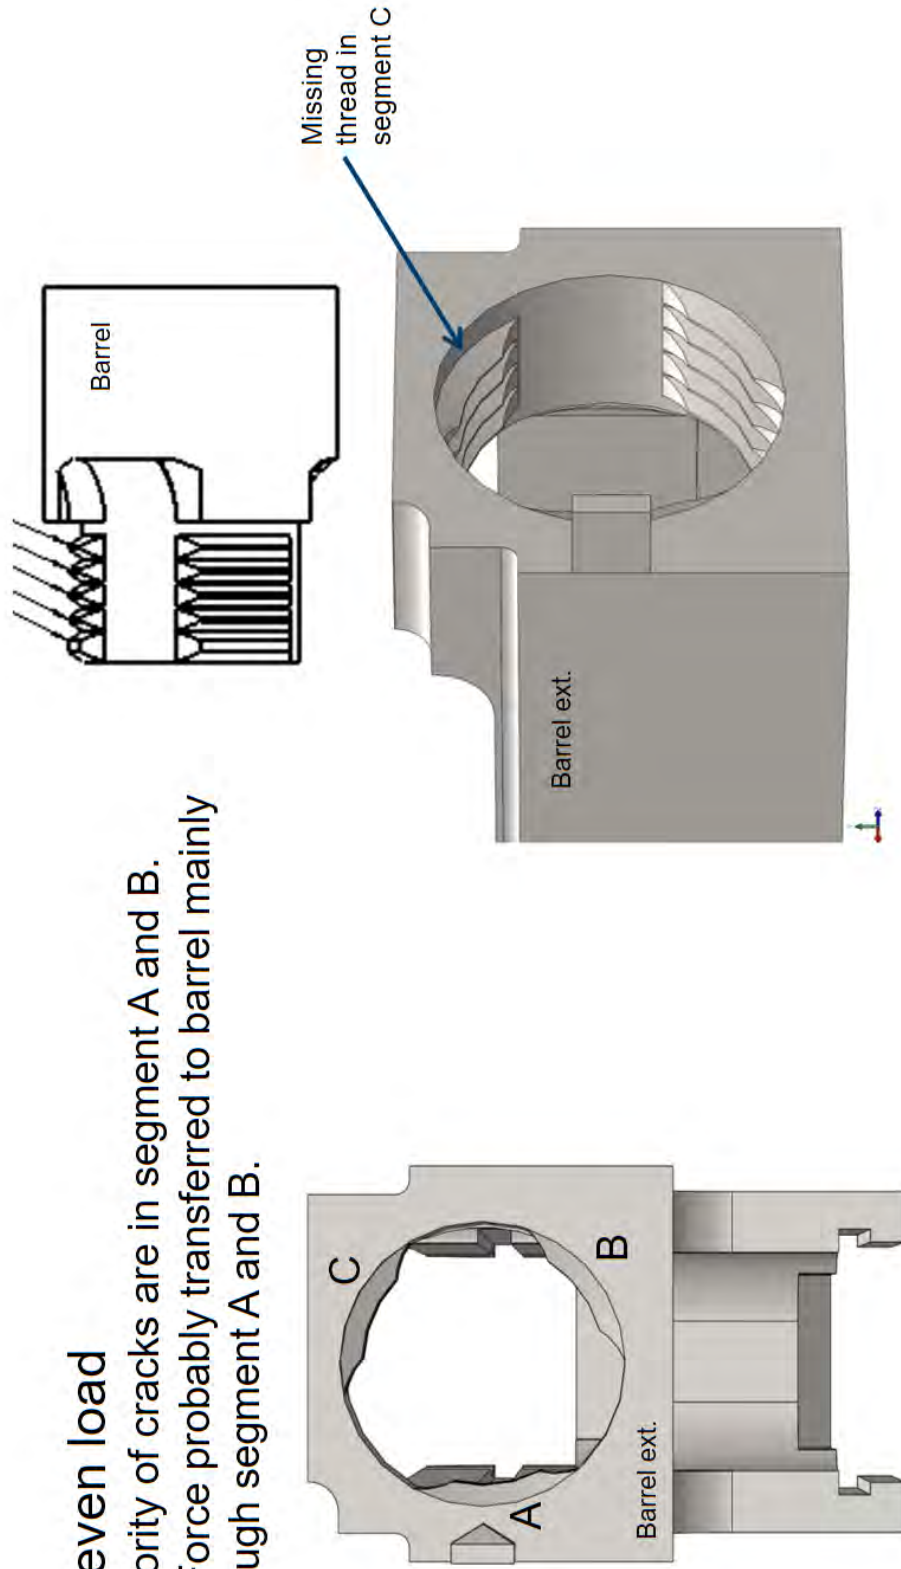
Missing I. ridge in segment C of the barrel extension.
